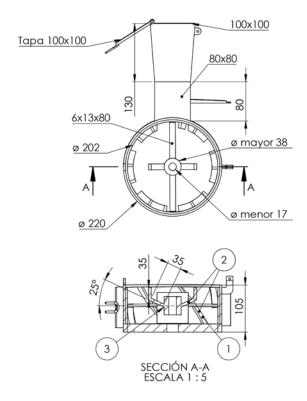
Front view and section A-A (internal) of the mill housing and feed hopper.
